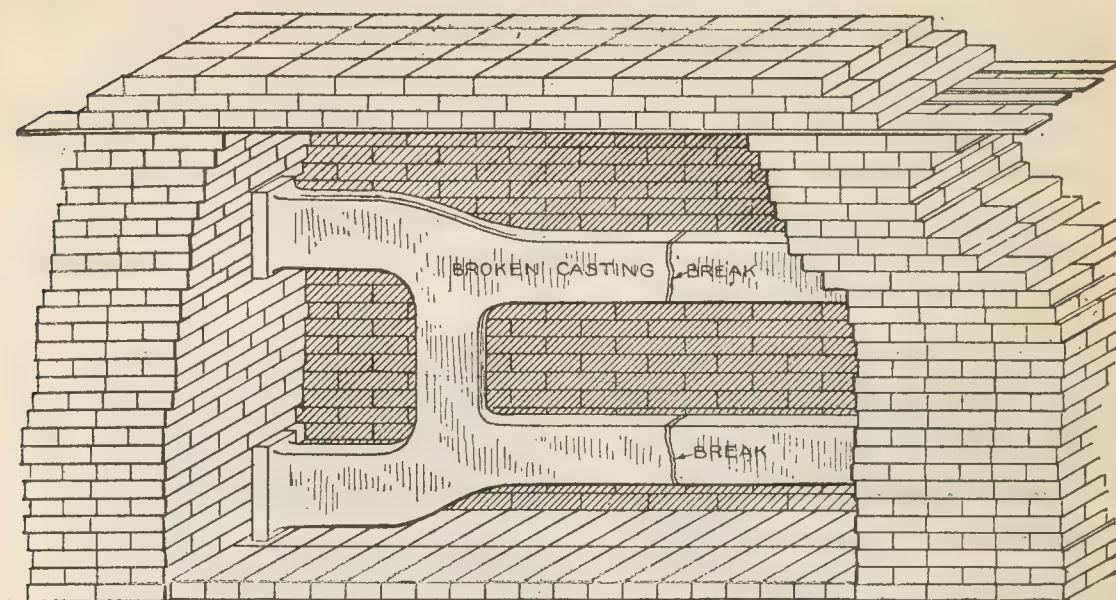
,987.—Quickly constructed furnace for brazing; view showing broken casting in position ready for brazing.
